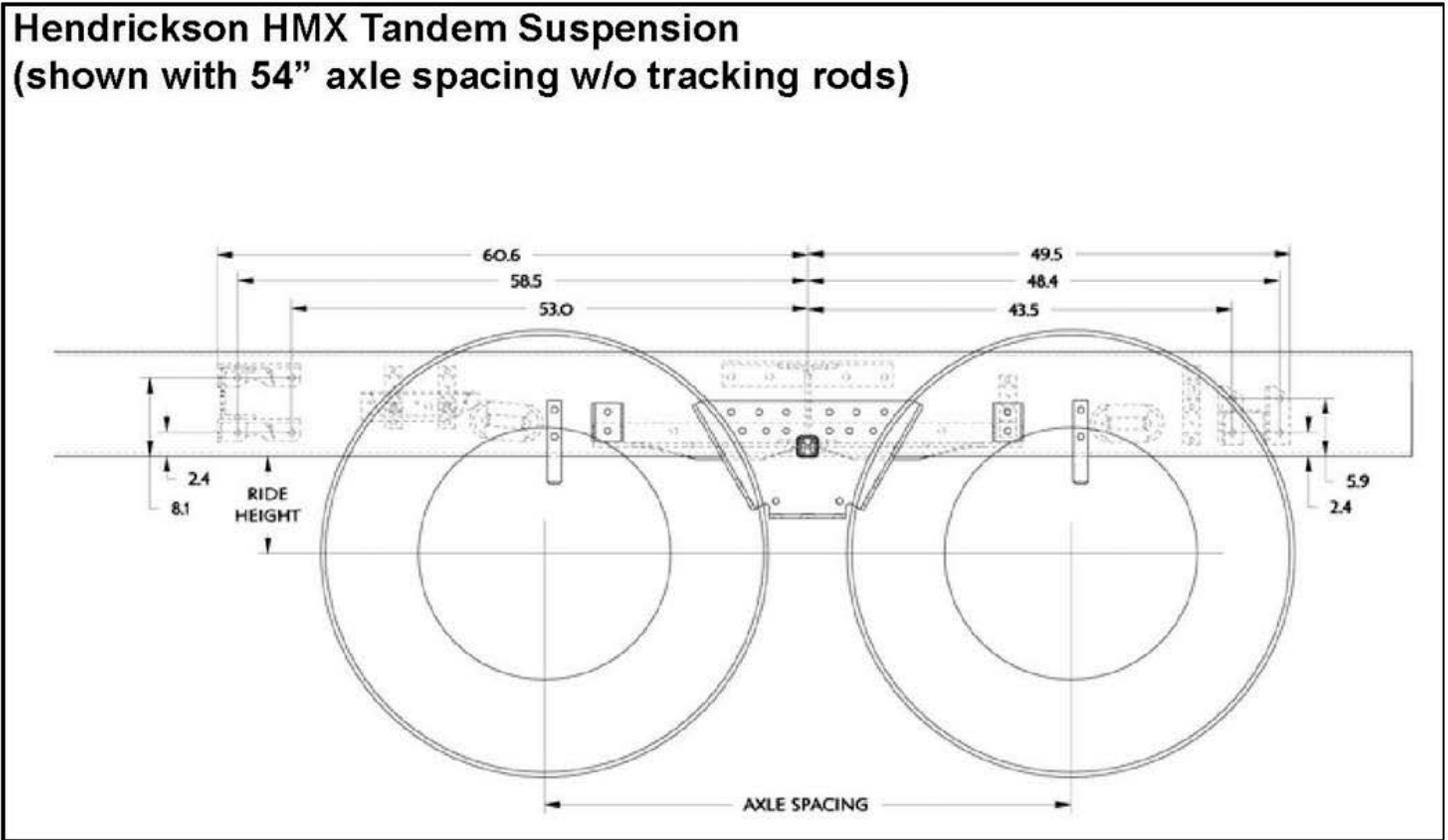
Hendrickson HMX Tandem Frame Drilling
